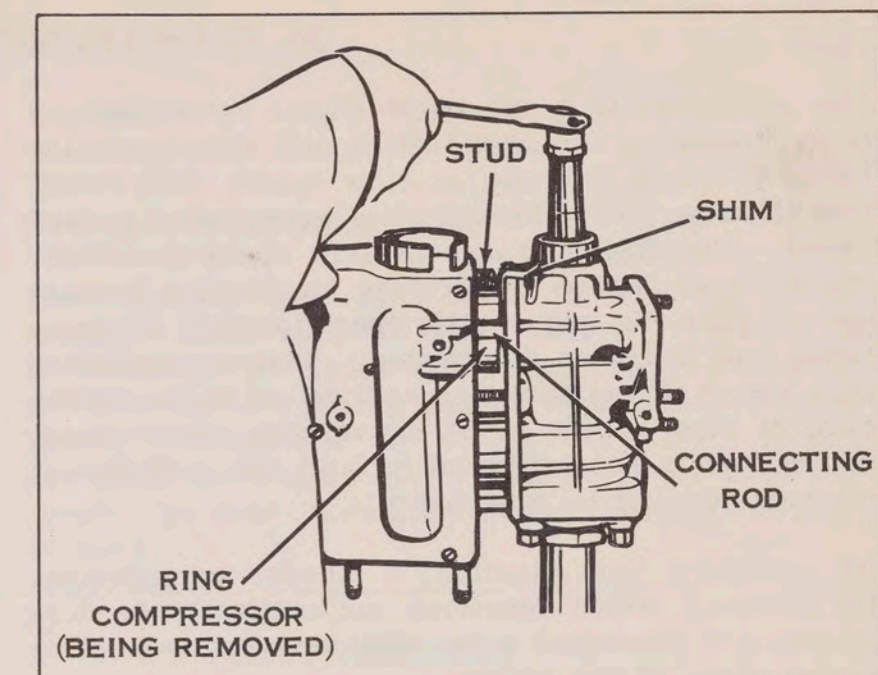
Assembling Crankcase to Cylinder (Step 2)
